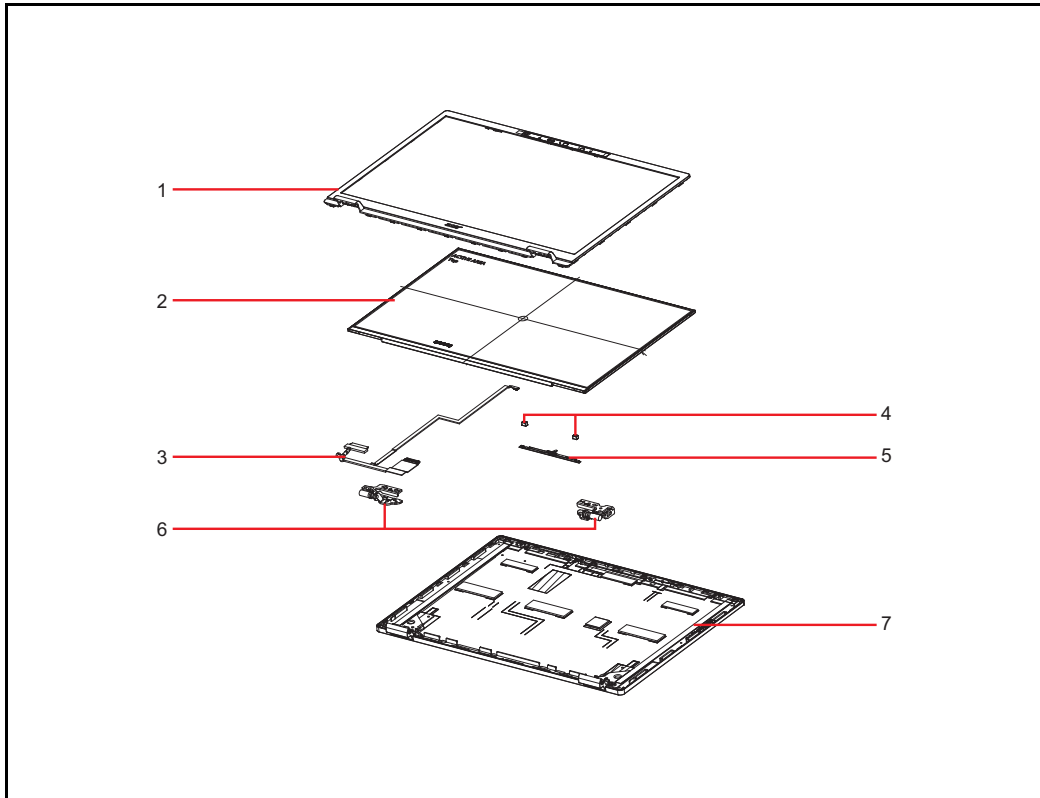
LCD Assembly Exploded Diagram (Clamshell Model)
